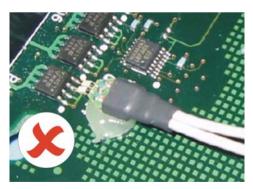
Incorrect securing method because glue is placed on the probe head tip
